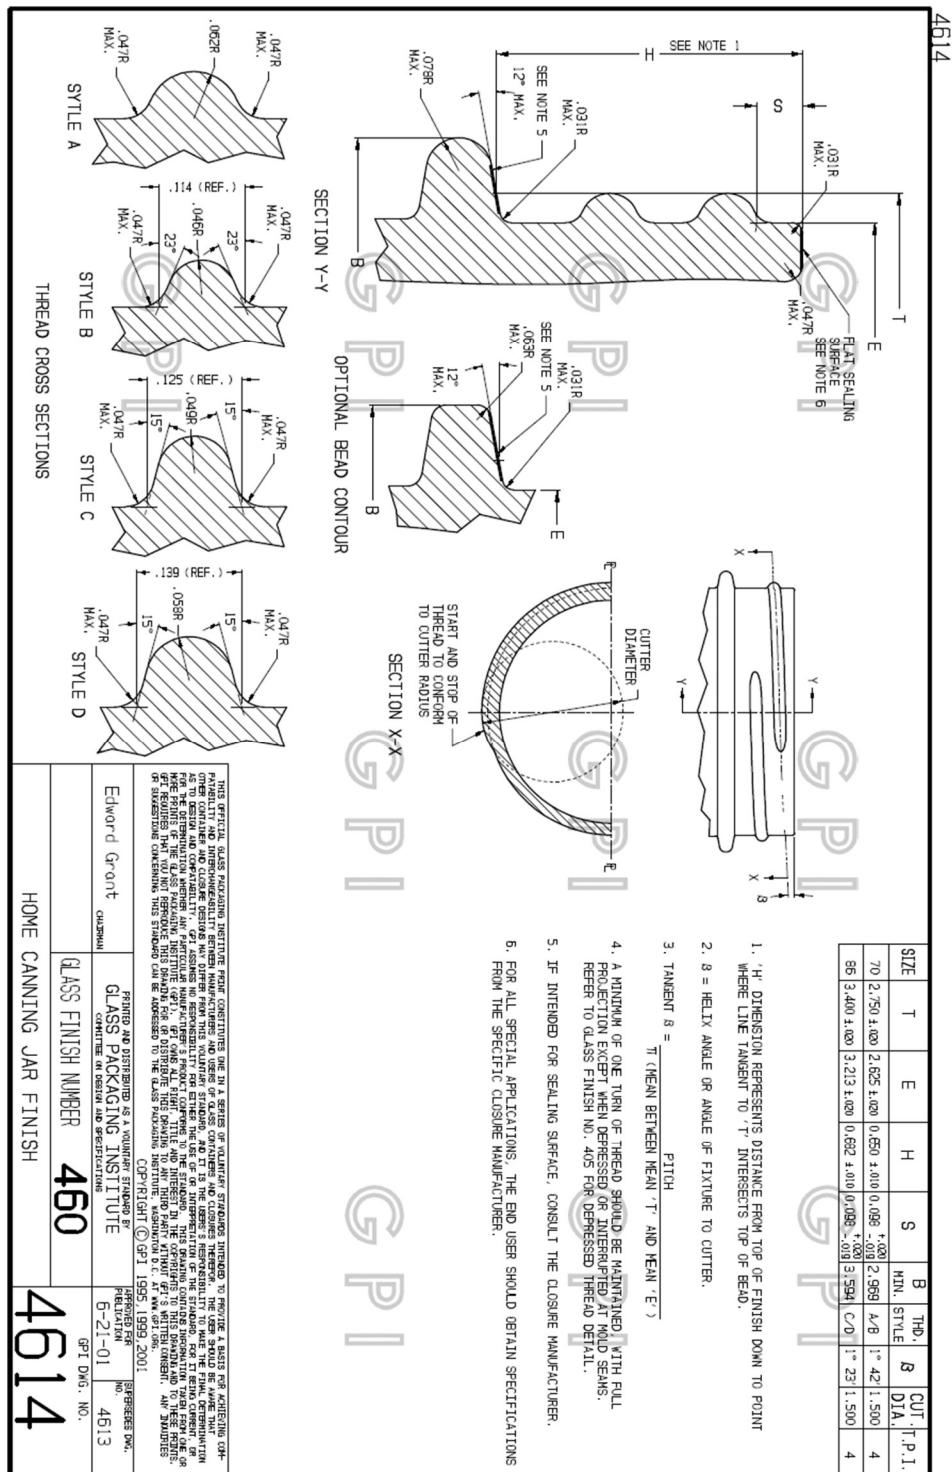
GPI Engineering Drawing of Standard Mouth Mason Jar Threading
